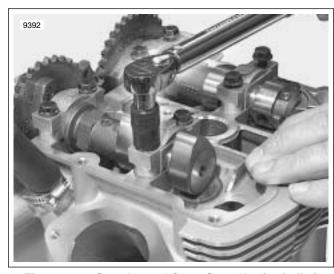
Cam Journal Caps @ 9.7 Nm (86 in-lbs)
